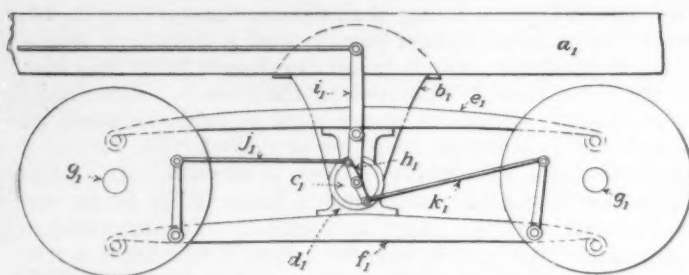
BRAKES USED ON THE MORELAND SIX-WHEEL TRUCKS
